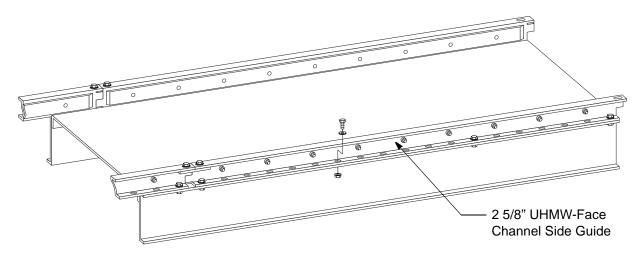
UHMW-Face Side Guide, 2 5/8" Channel
